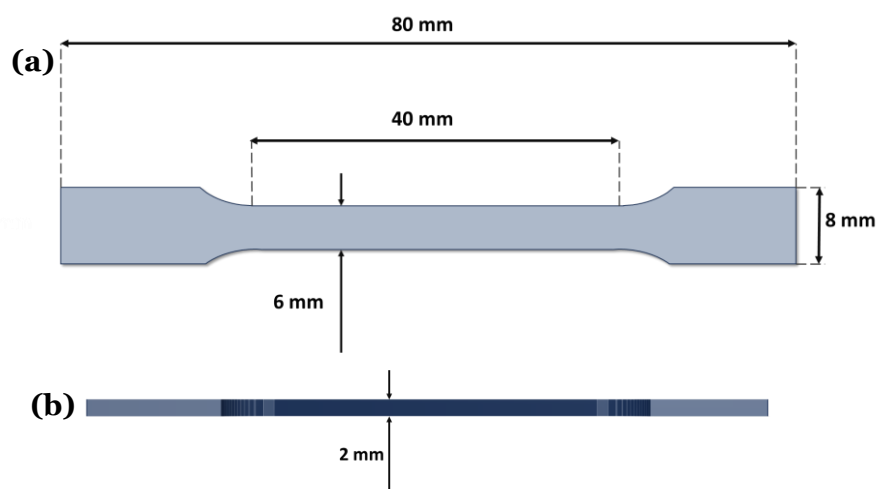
Dimensions of tensile specimen printed. The gauge length is 40mm and the thickness is 2mm.
